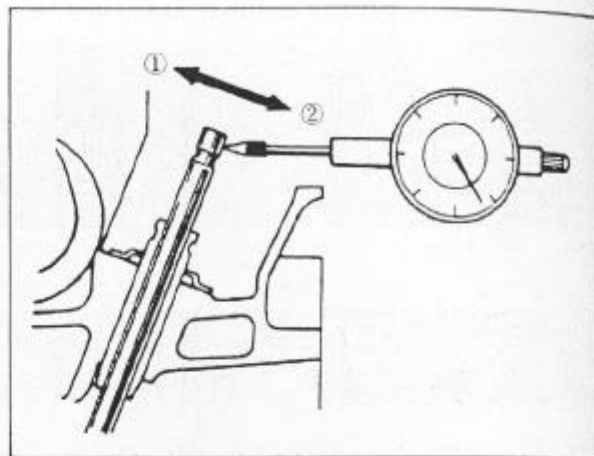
A — 55 MEASURING THE CLEARANCE OF VALVE STEM
